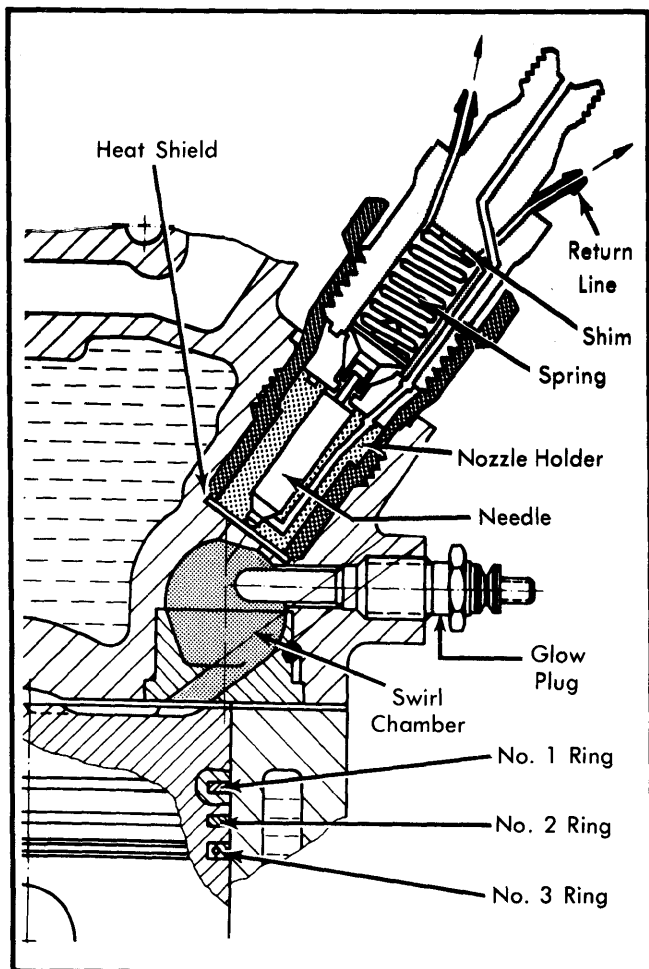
Cutaway View Showing Relationship of Injection Nozzle, Glow Plug and Swirl Chamber to Piston
